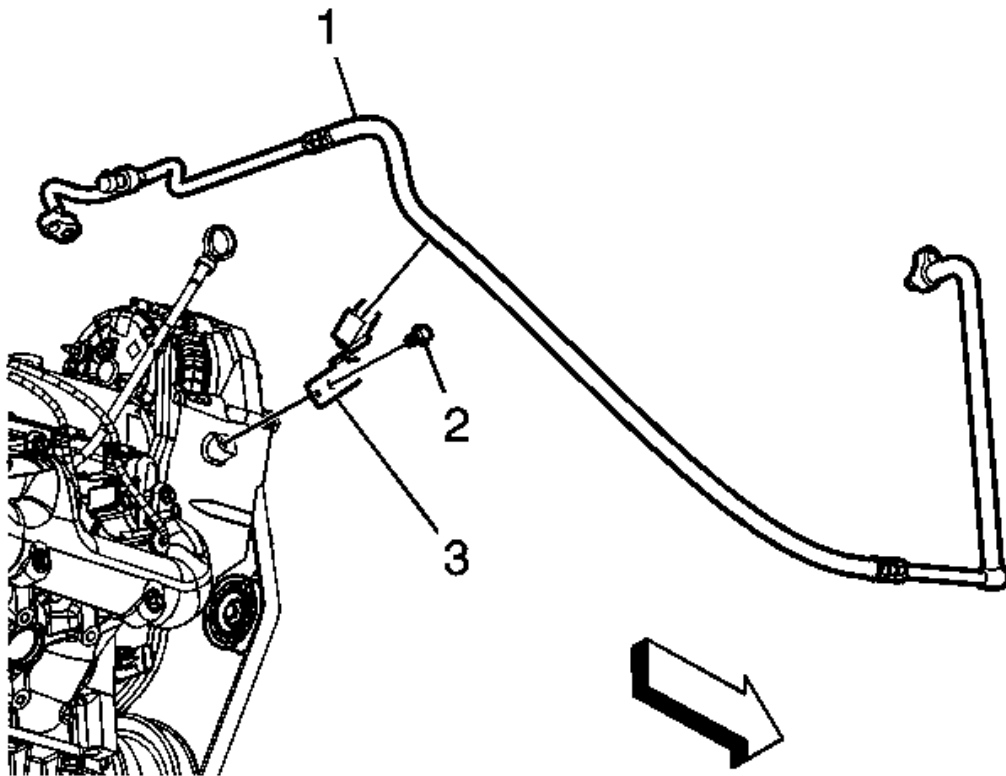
View Of A/C Compressor & Condenser Hose Bracket & Bolt
